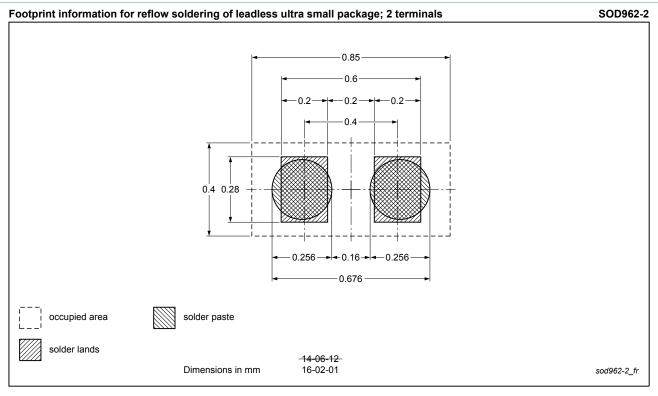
Reflow soldering footprint for DSN0603-2 (SOD962-2)
